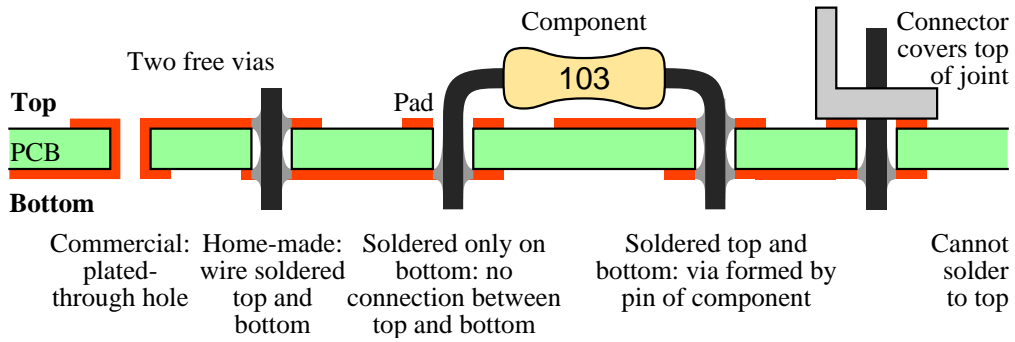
Cross-section of a double-sided printed circuit board showing free vias formed by a plated-through hole and a wire through a non-plated hole soldered top and bottom. A via can also be formed using a pin-through-hole component but not at a connector because it covers the top pad.
